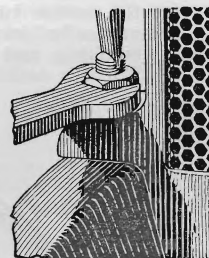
A slot sawed in end of bolt for screwdriver for tightening radiator bolt
